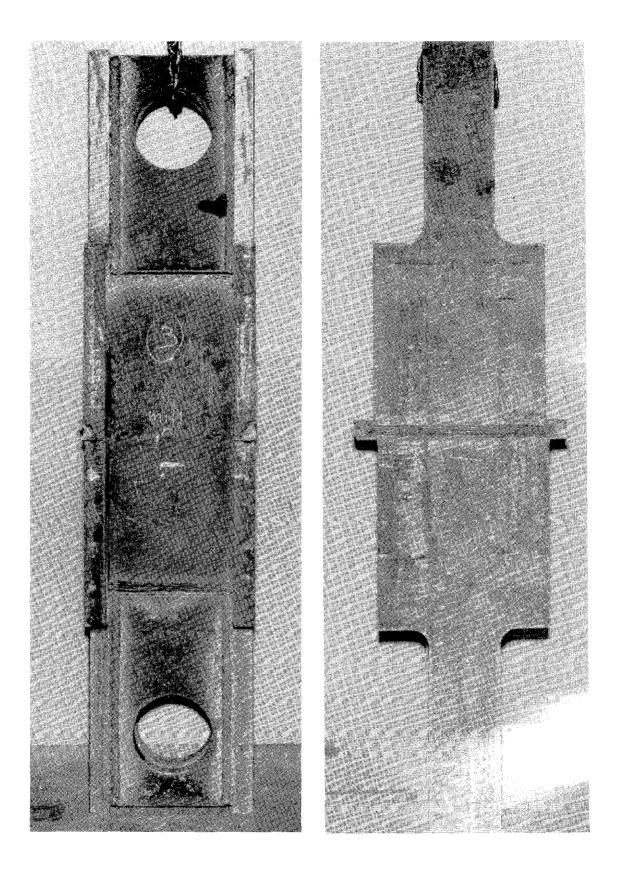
TYPICAL FABRICATED SPECIMEN.
